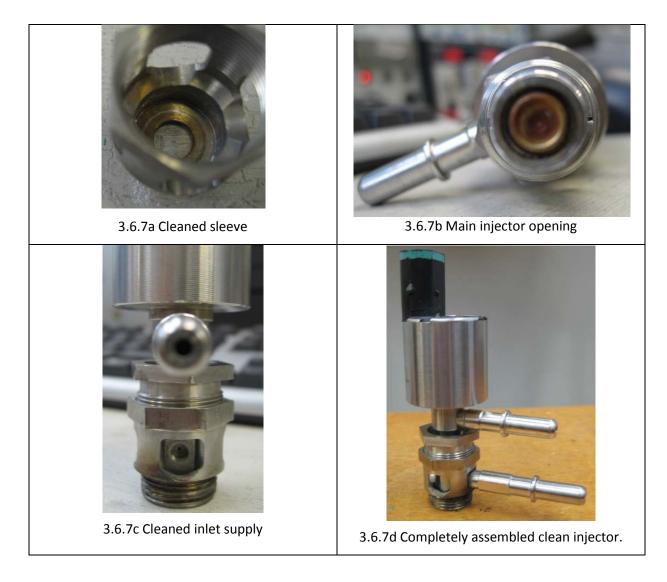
Final visual inspection of fully cleaned injector
